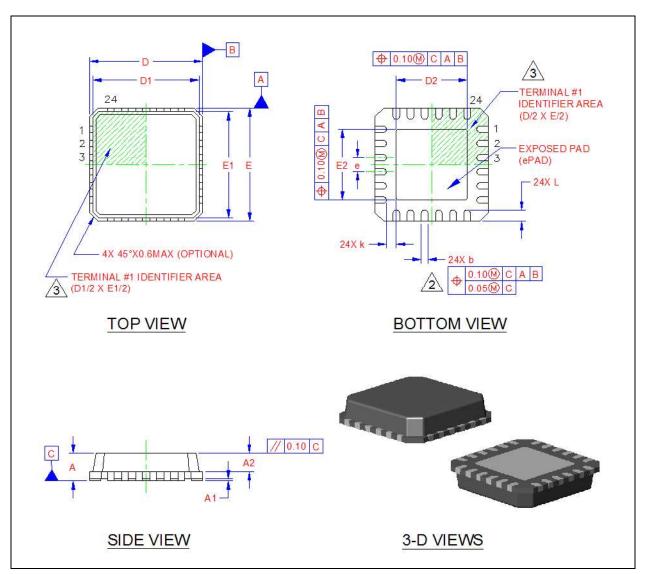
CAP1188 Package Drawing - 24-Pin QFN 4mm x 4mm
